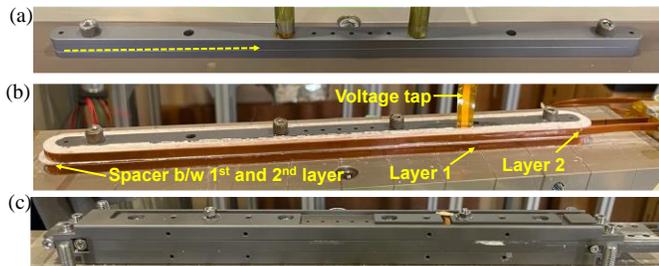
(a) Photograph of SS central island. (b) details of double pancake racetrack coil with voltage tap and spacer between 1st and 2nd layer. (c) Complete assembly of coil and support structure.
